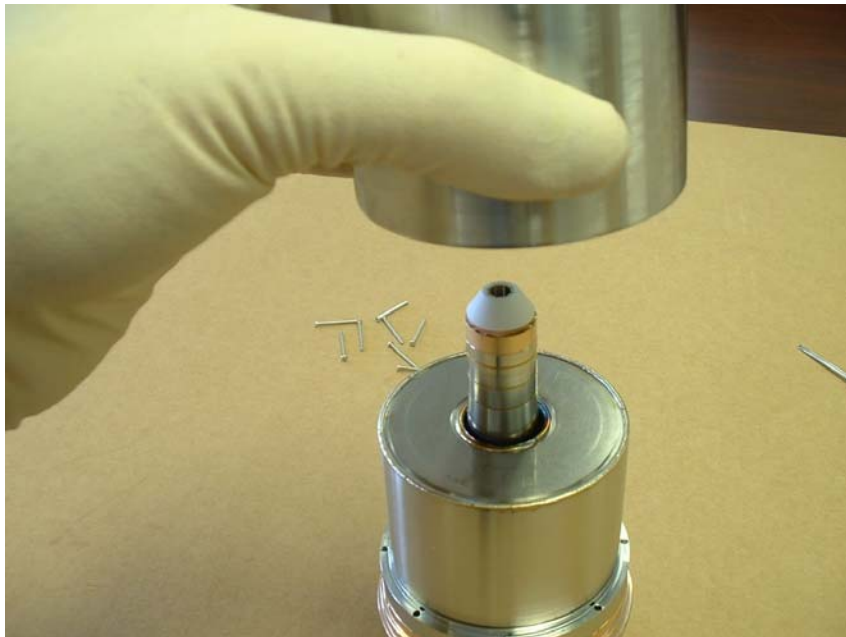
Scribe the objective assembly so that the nose cap may be realigned during reassembly.
